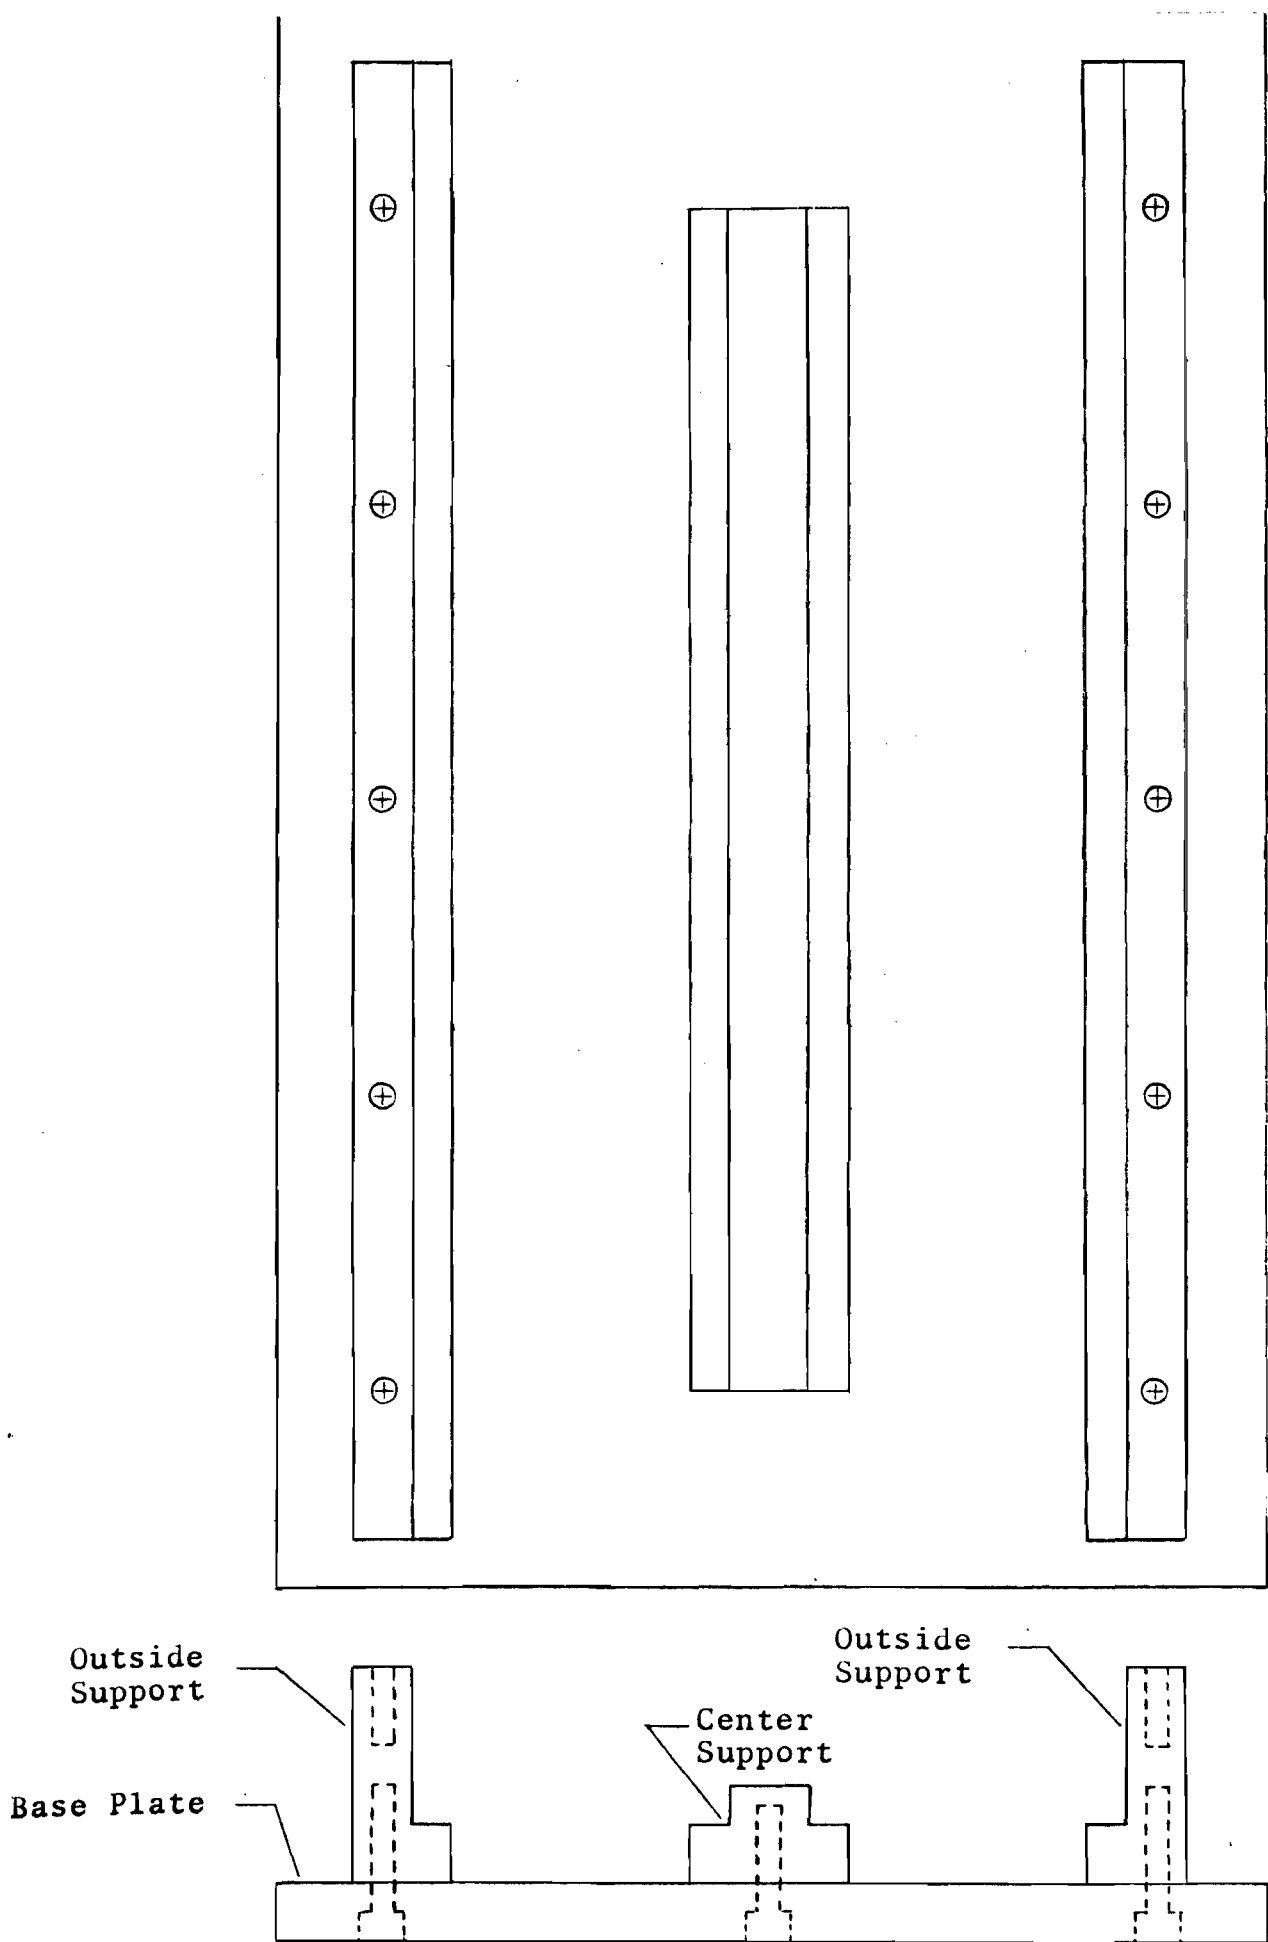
ASSEMBLY OF BASIC TEST FIXTURE COMPONENTS FOR SINGLE-SHEAR (SIMULATED DIAPHRAGM ACTION) TEST FIXTURE
